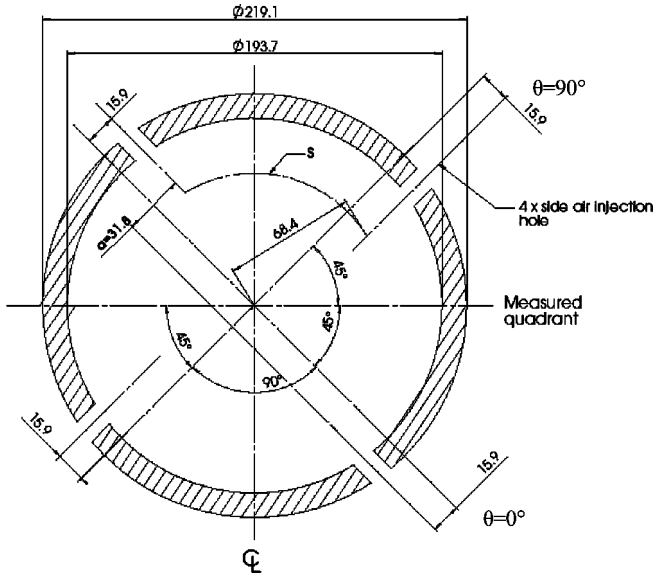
Section view of the combustor at  $z/D = 0.2$  depicting the side air injection holes (all dimensions in mm).
